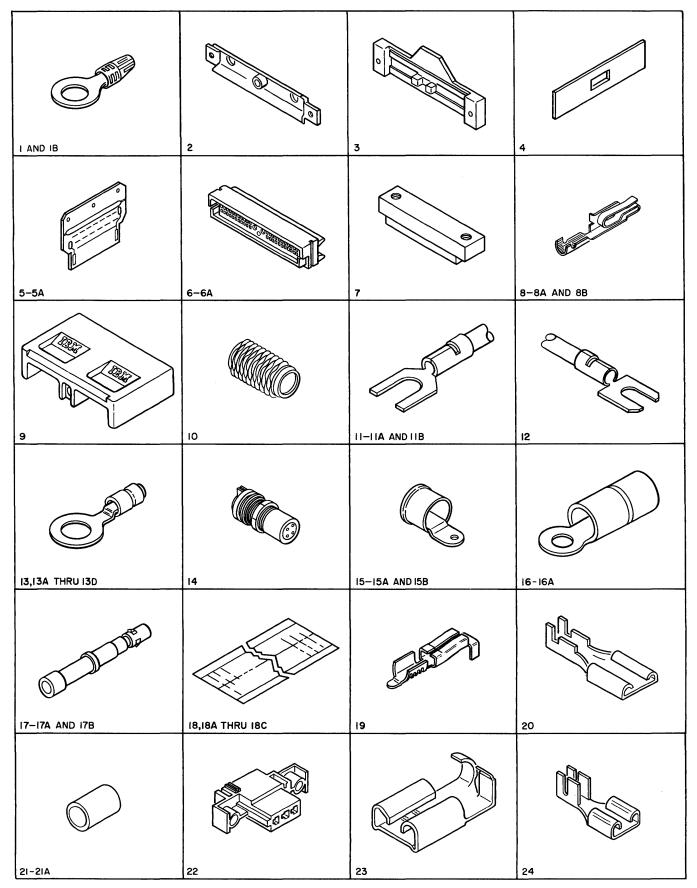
CABLE AND JUMPER ASSEMBLY COMPONENT PARTS. SHEET 1 OF 2. SEE LIST 25.
